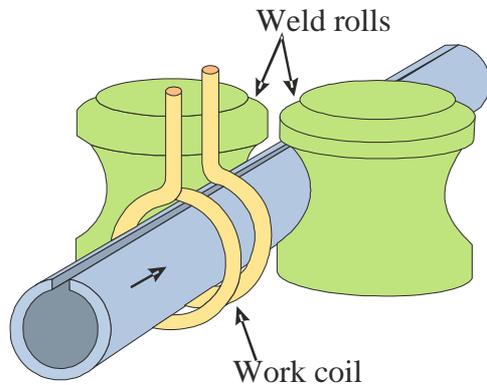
Schematic of the longitudinal high frequency seam welding of tubes using inductive welding
